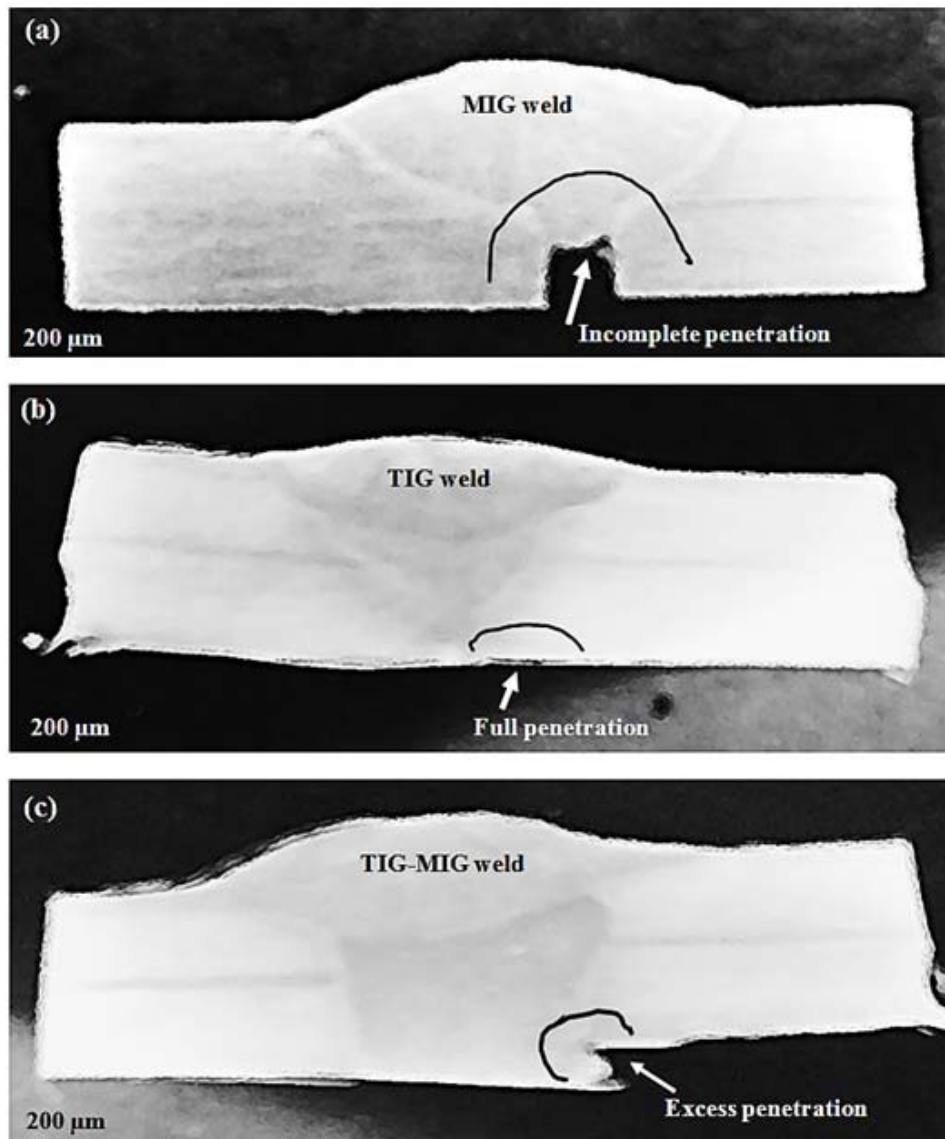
Macrographs of the welded joints (a) MIG weldment of sample F2; (b) TIG weldment of sample F4; (c) hybrid TIG-MIG weldment of sample F6
